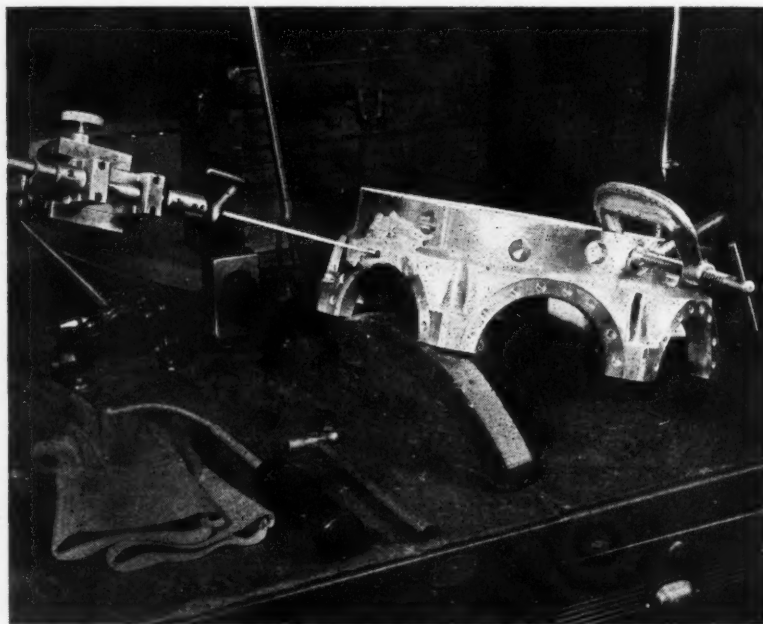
Extracting a Pilot that has been Broken in a Drilled Hole of a Cylinder Pad
